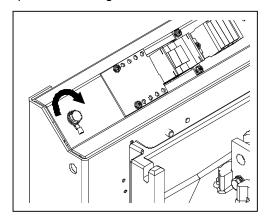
Fasten the crimped terminal using the hexagonal bolt (M8) provided with the unit.
